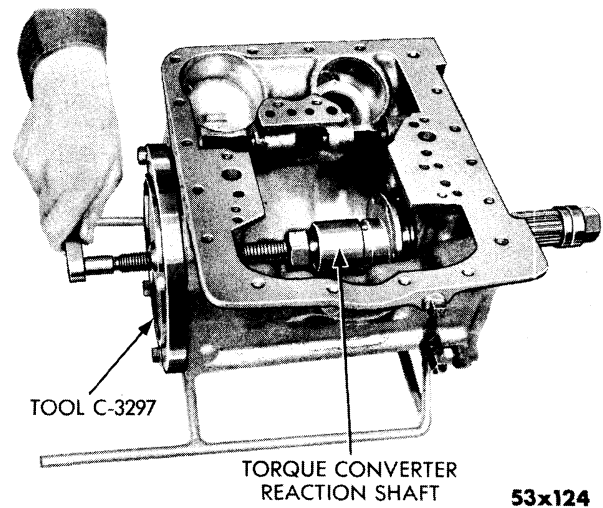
Removing Torque Converter Reaction Shaft (Typical View)
